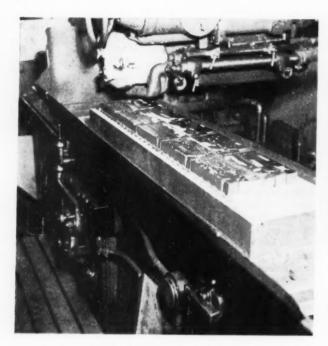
SURFACE-GRINDING TOOL SHANKS
